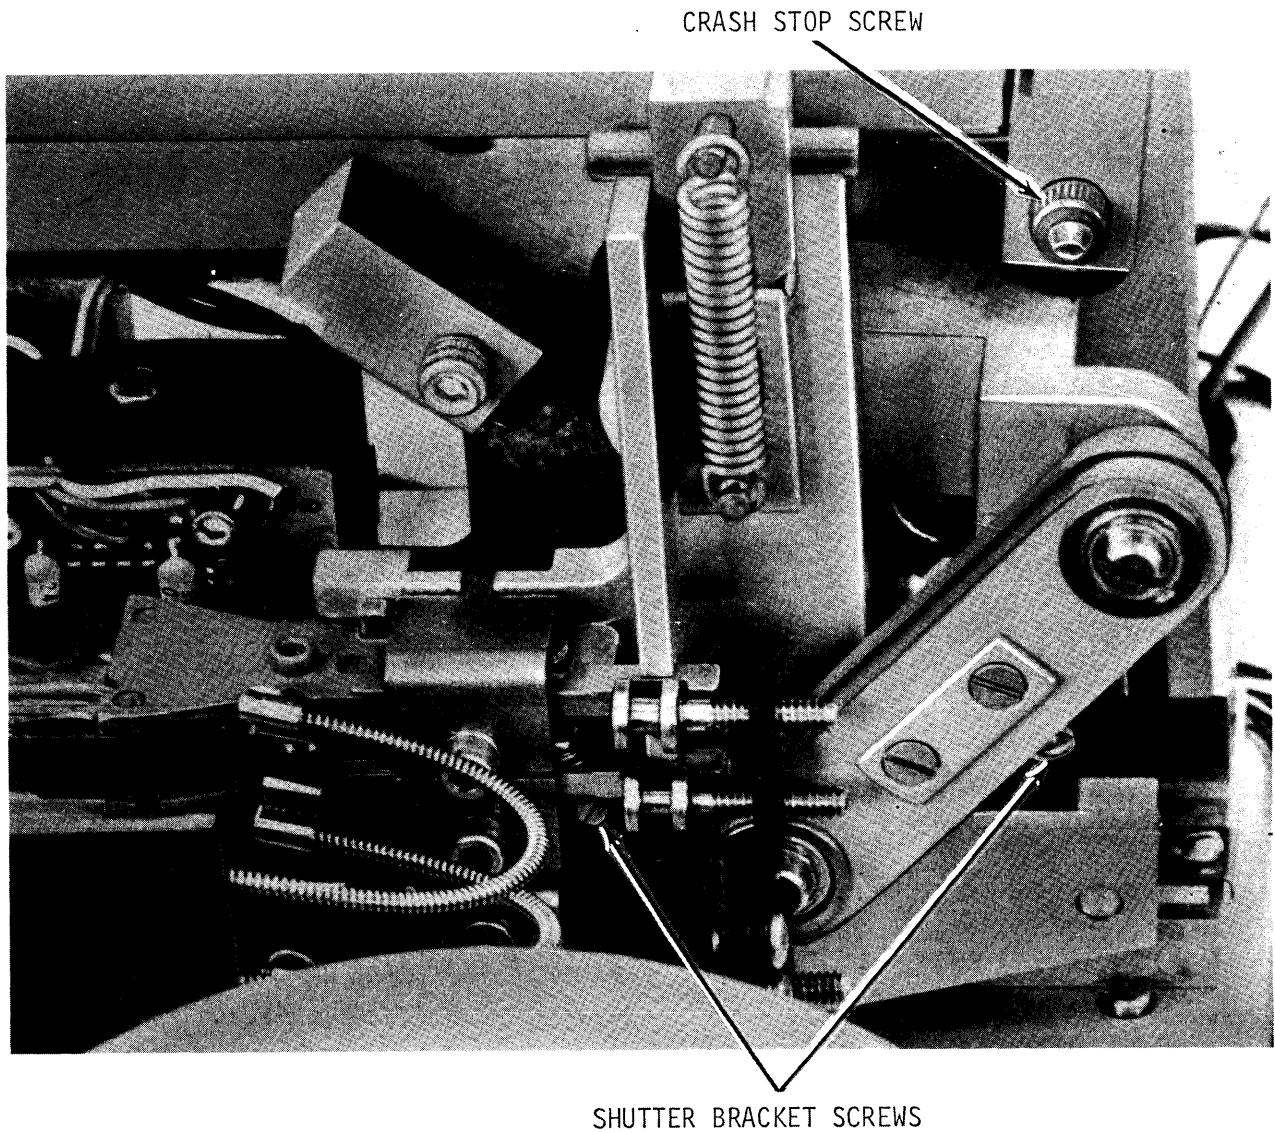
Shutter Removal, Crash-Stop and Shutter Adjusting Bracket Mounting Screws
